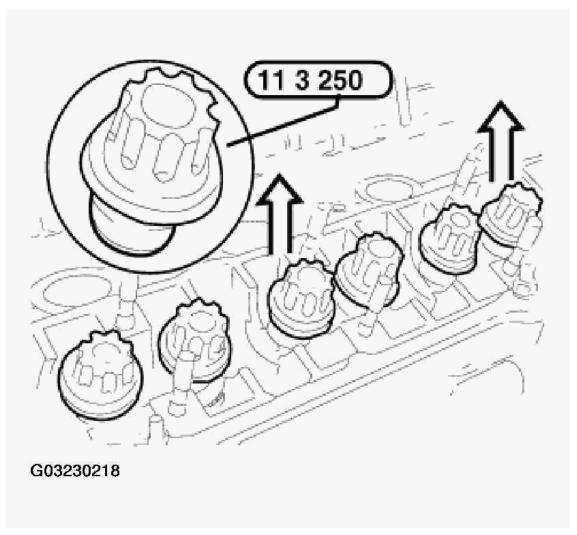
Removing Bearing Strip With Bucket Tappet Courtesy of BMW OF NORTH AMERICA, INC.
